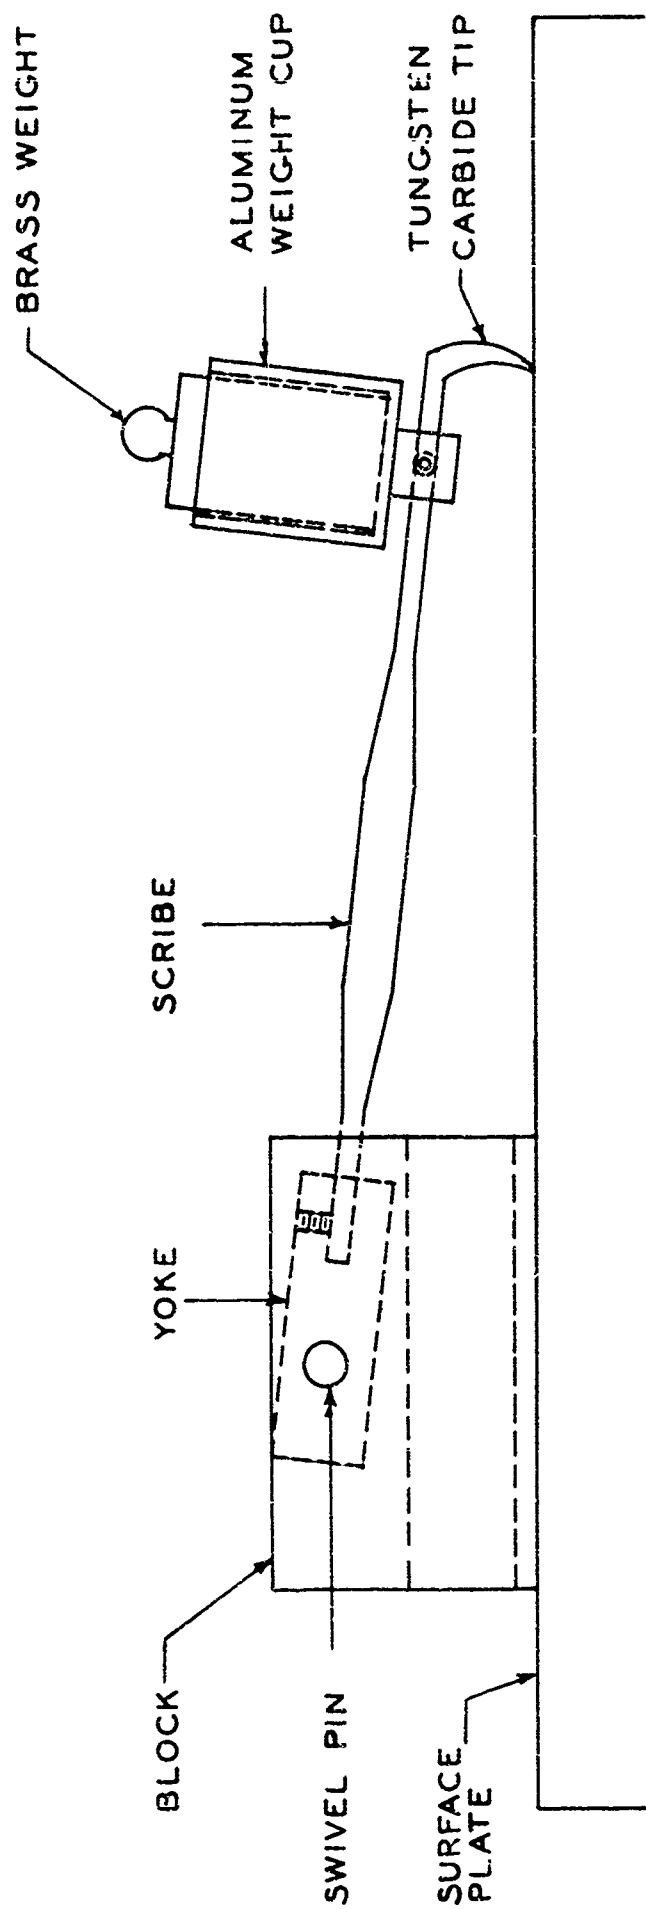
DIAPHRAGM SCRIBING TOOL
